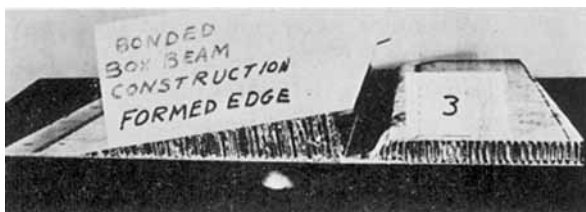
Box beam wing trailing edge cross-sectional view—bonded sandwich construction in Boeing B-52. New design that performs satisfactorily under sonic fatigue load.
